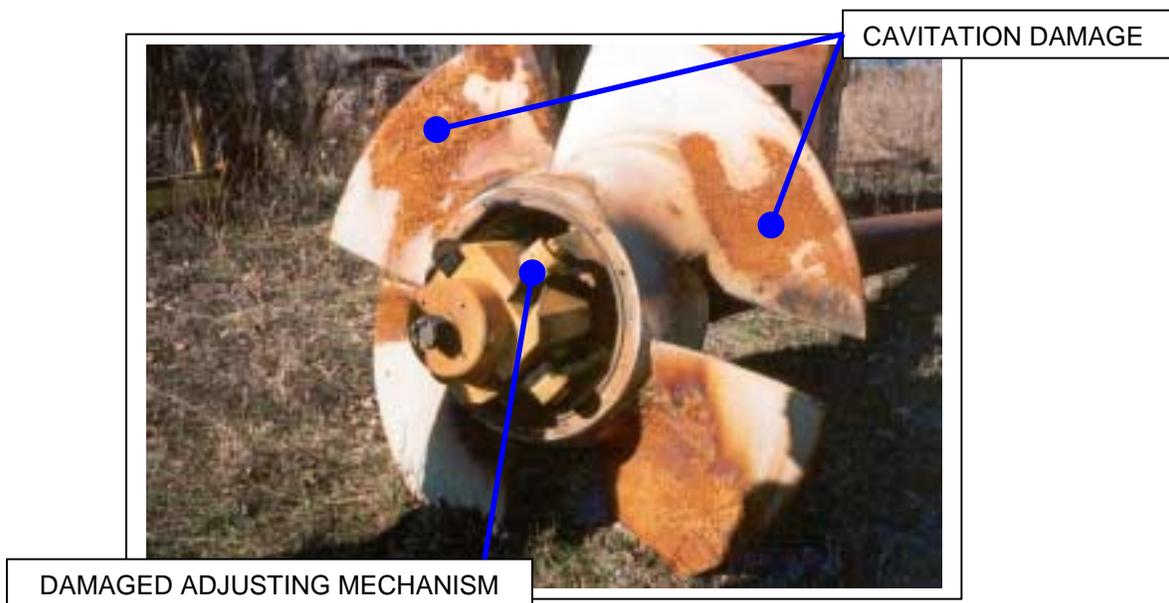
Photograph of old blade and hub assembly showing cavitation damage and damaged adjusting mechanism (runner diameter is 5 feet).
